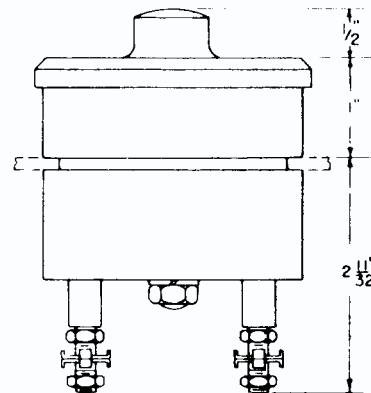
(8918488B) Semiflush Mounting on 1/8-inch Steel Panel
